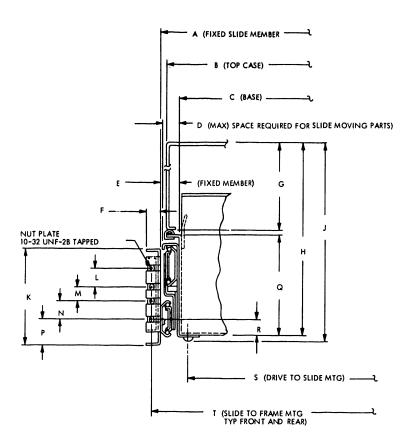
RACK MOUNTING DETAILS (WITH OR WITHOUT SLIDES)
